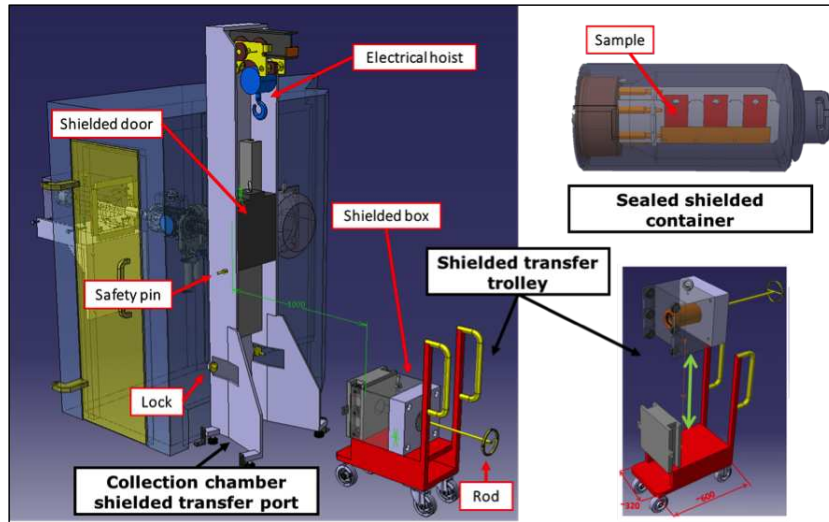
3D drawing of the shielded wall around the collection chamber assembly [drawing: S.Marzari, CERN].
